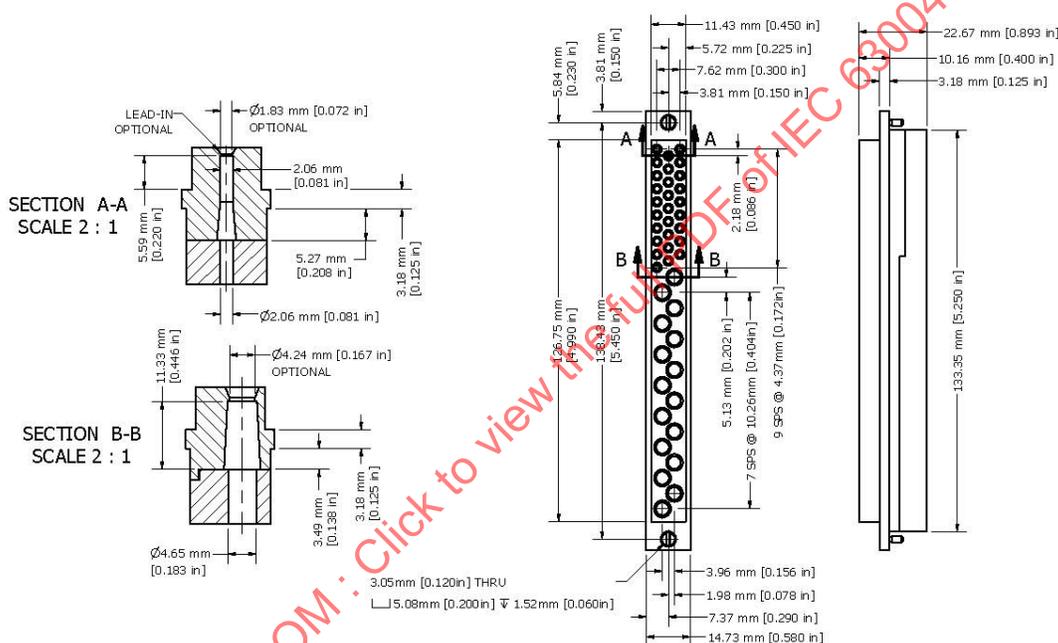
Mixed power module connector, 28-10 A/1 6-20 A position, receiver housing physical layout
